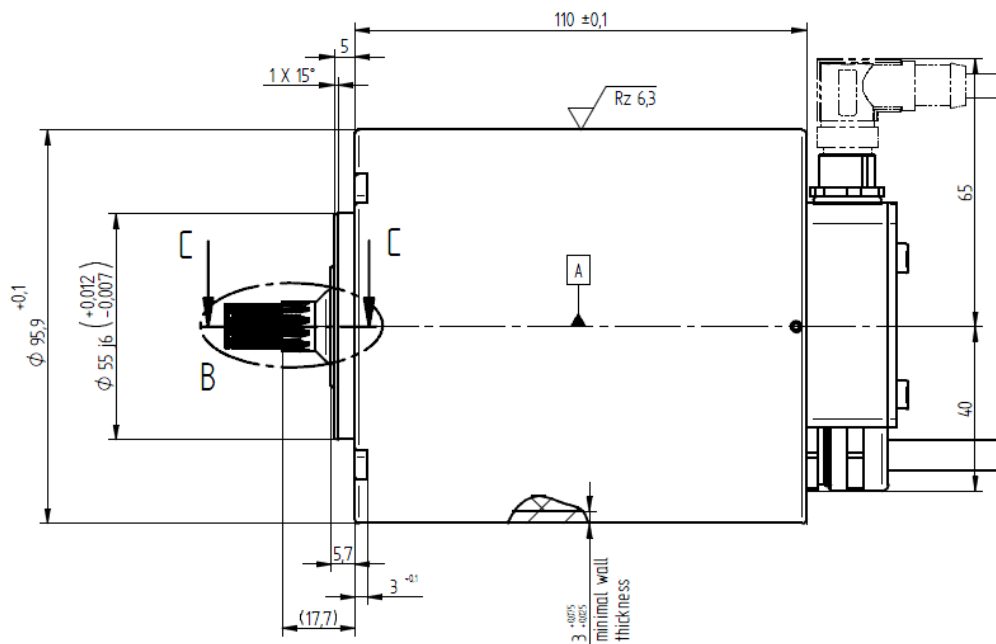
Mechanical drawing of AMK motor model: DD5-14-10-POW.
